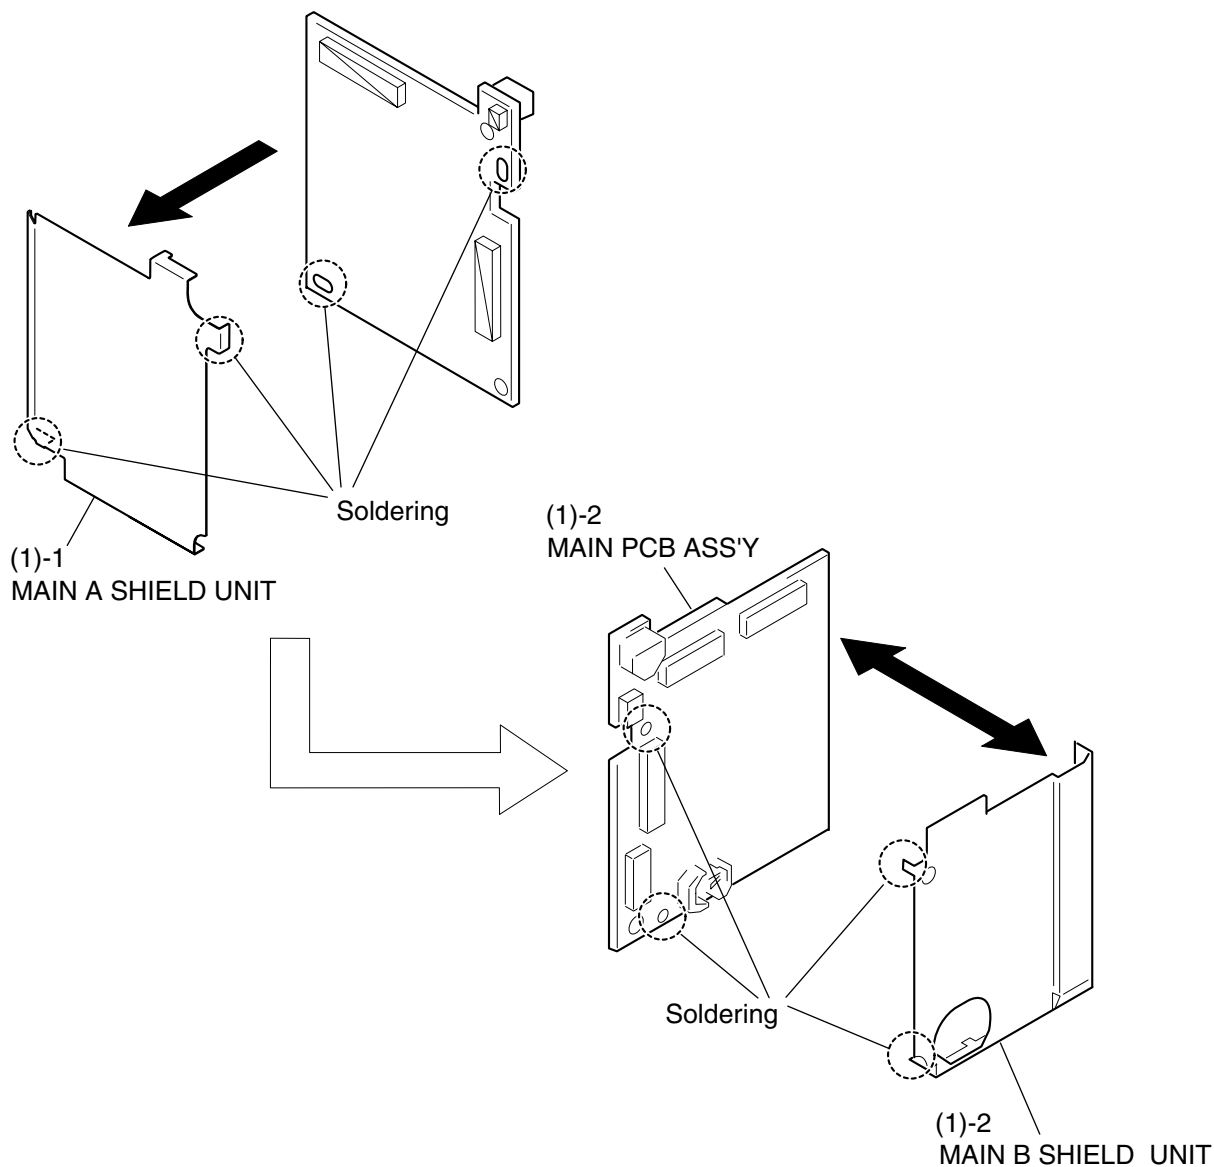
MAIN A SHIELD UNIT, MAIN B SHIELD UNIT, MAIN PCB ASS'Y
